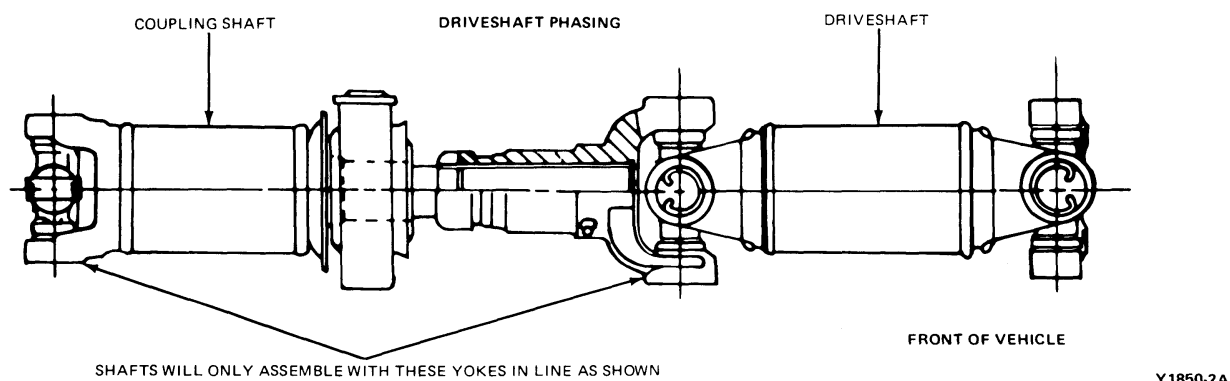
Driveshaft Phasing—Two-Piece Driveshaft
